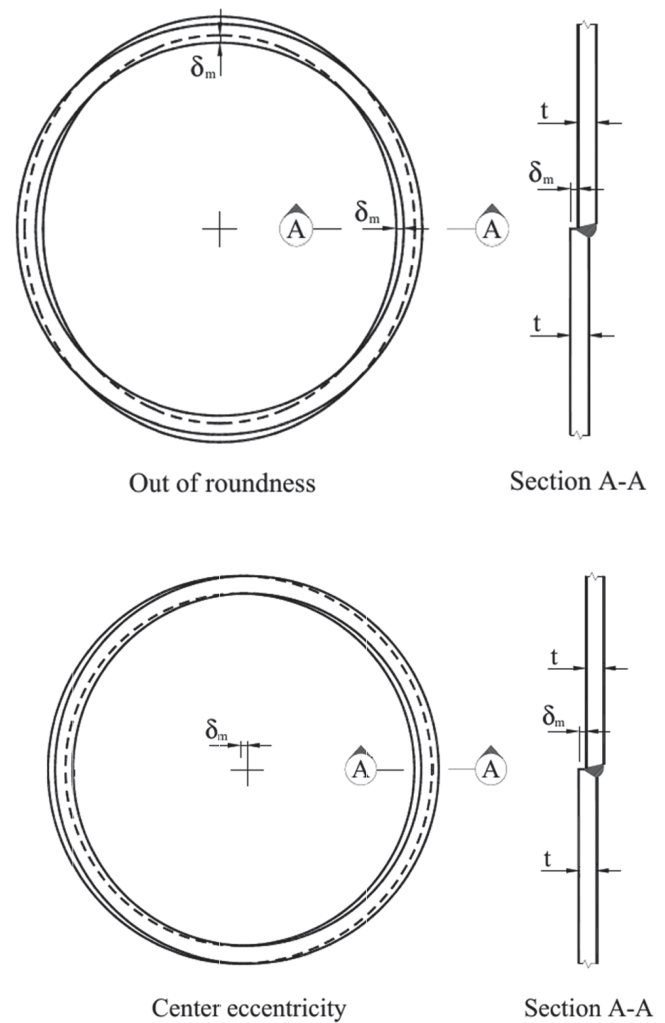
Sketch presenting a procedure to determine geometric imperfection δ_m on butt weld of two pipe elements, according to DNV GL [29]
